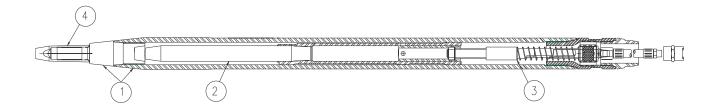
Model 310-TH Hole-Hog Complete Assembly Serial Number 499 and Below
